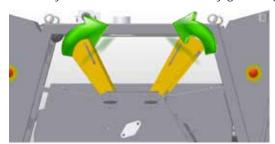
OPTICAL INSPECTION ZONE — SCAN SHIELDS
